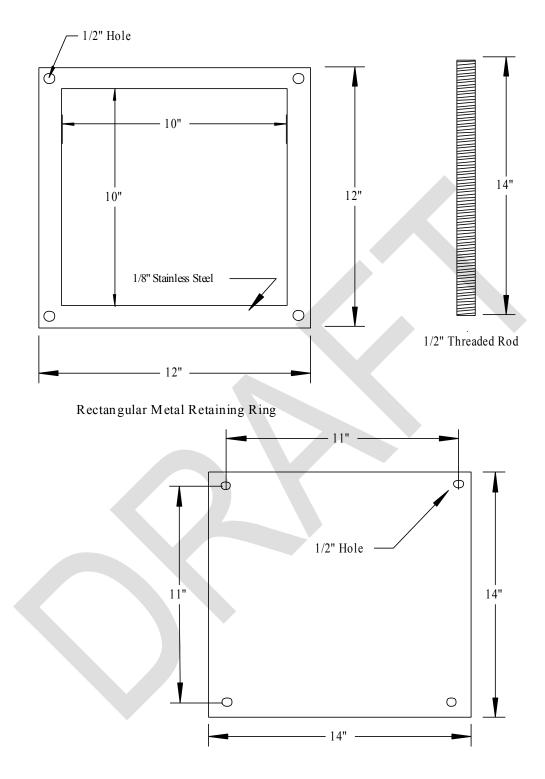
Horizontal Test Apparatus Assembly – Mounting Plates
